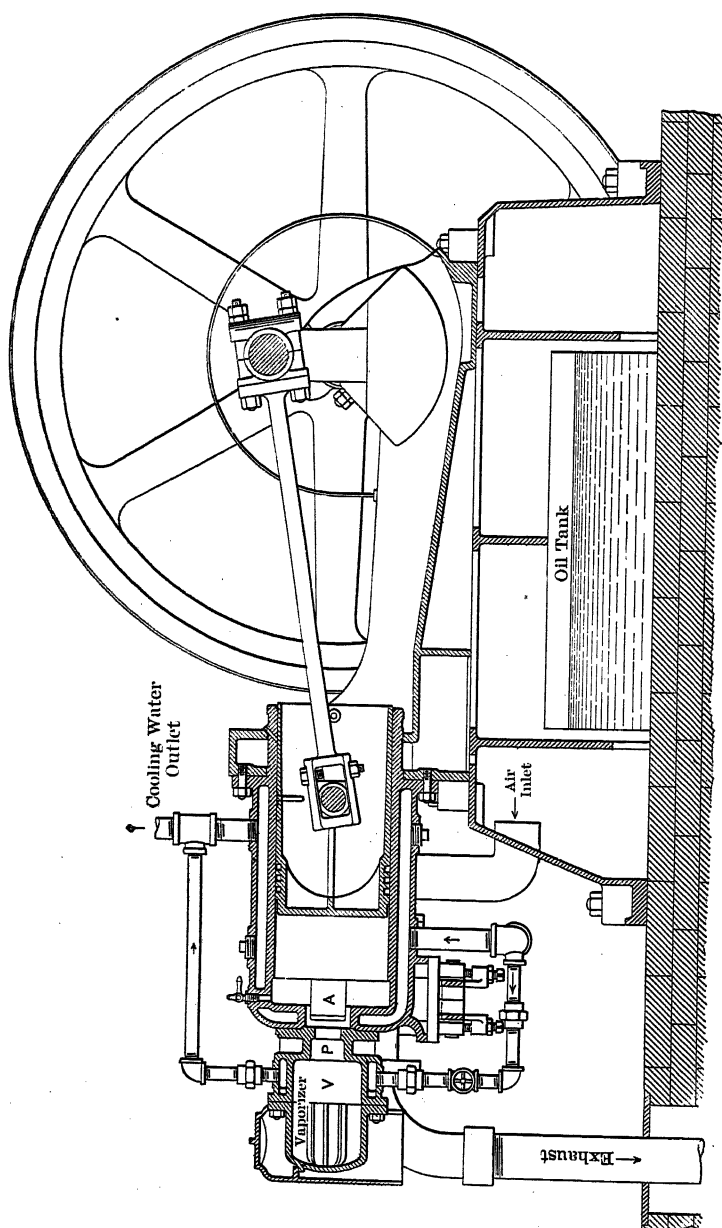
Section through Hornsby-Akroyd Oil Engine.
